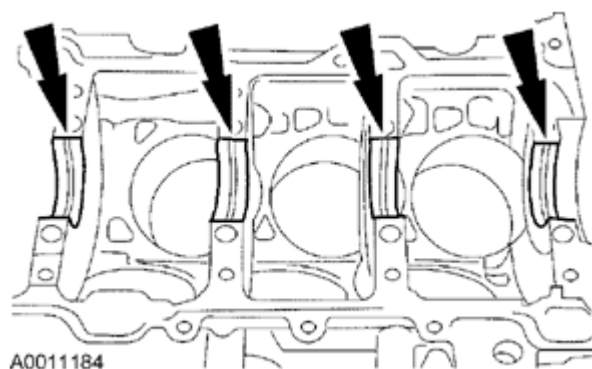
Locating Crankshaft Main Bearings In Cylinder Block
